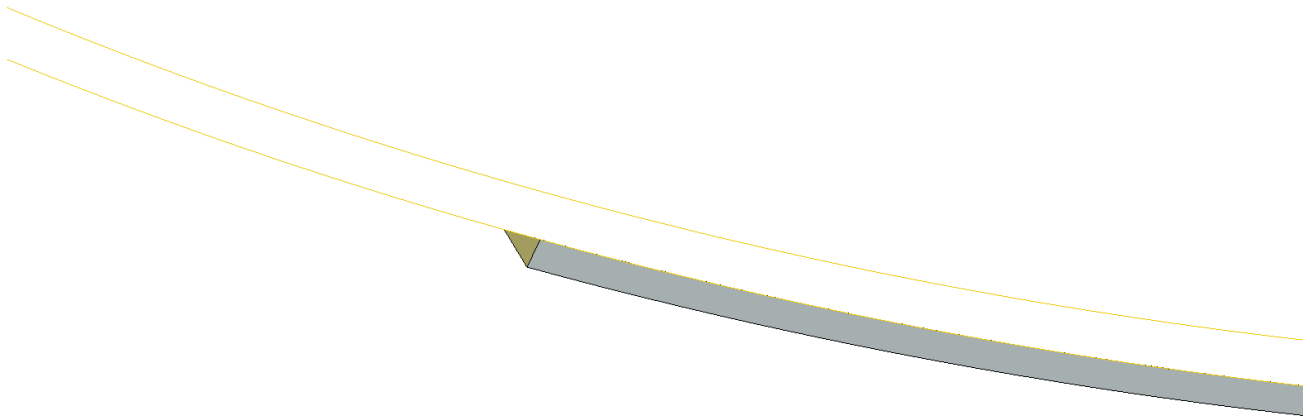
A cross section containing the tank shell, cradle pad and the cradle pad weld.
